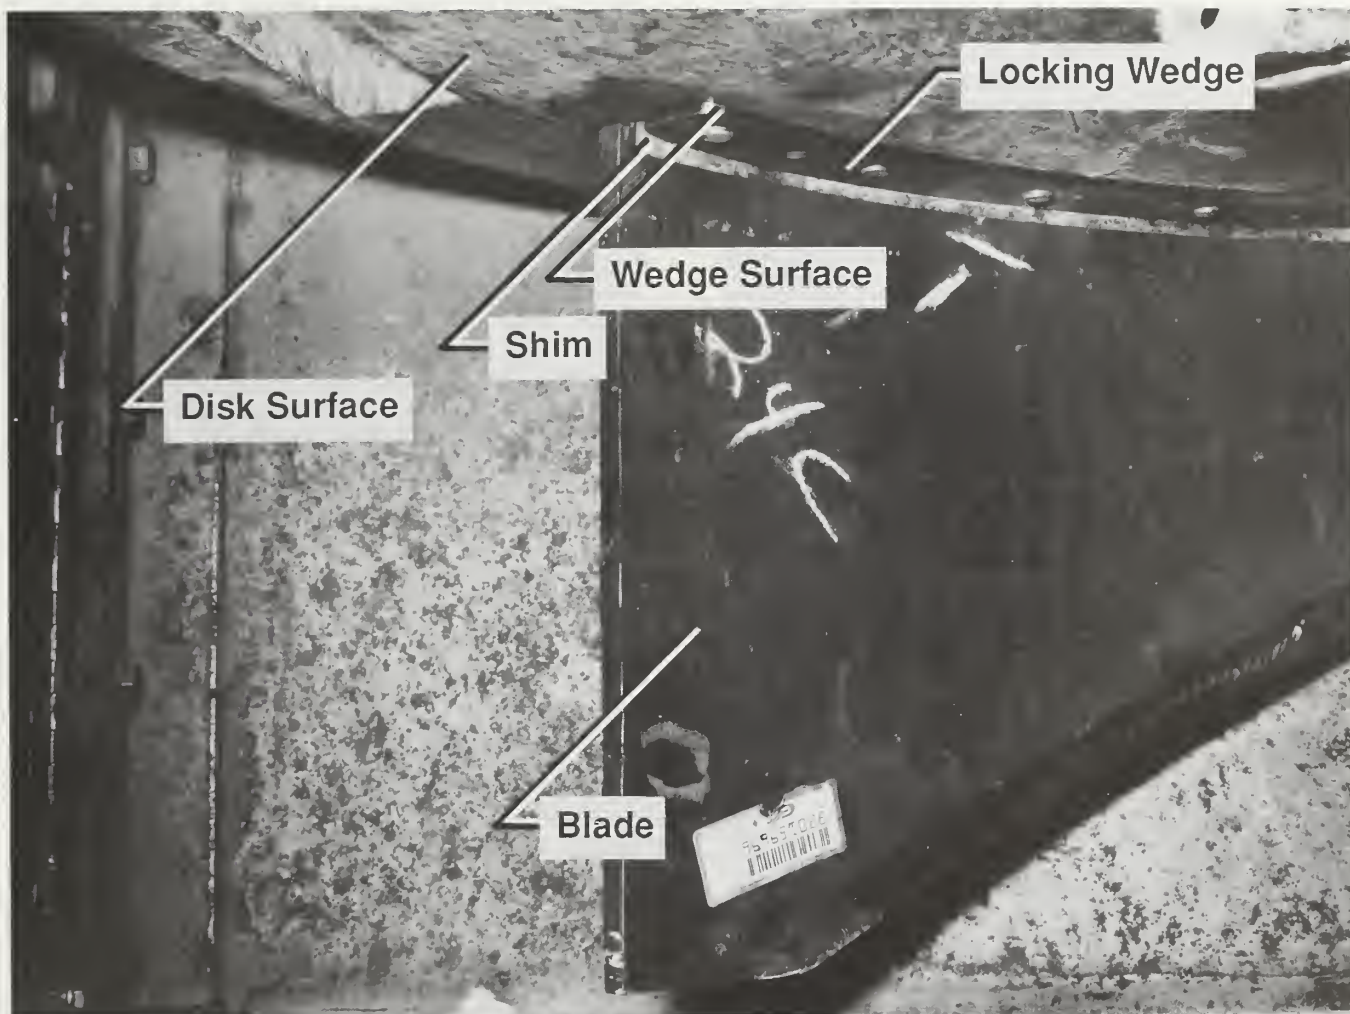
Tapered locking wedge used to lock cutting blade to disk.
